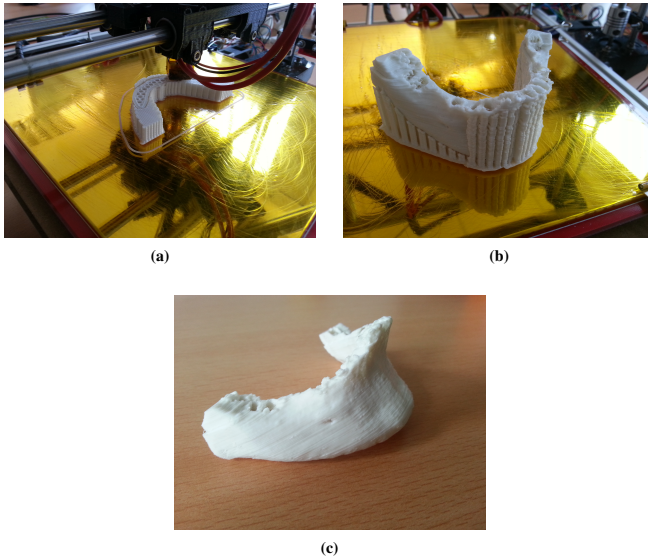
A model of the lower jaw is printed via a REPRAP MENDELMAX printer. (a) To be able to print overhanging/floating parts, additional support material (striped areas) is printed around the desired structure. The inner parts of the model are filled with a honeycomb pattern to reduce printing times and to gain stability. (b) The printing result with support material. (c) The lower jaw model after manual removal of the supports.
